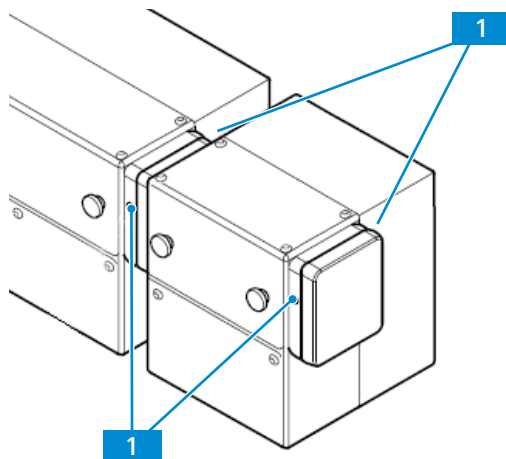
Assembling or Removing a Detector Module (e.g. NDD.2)
